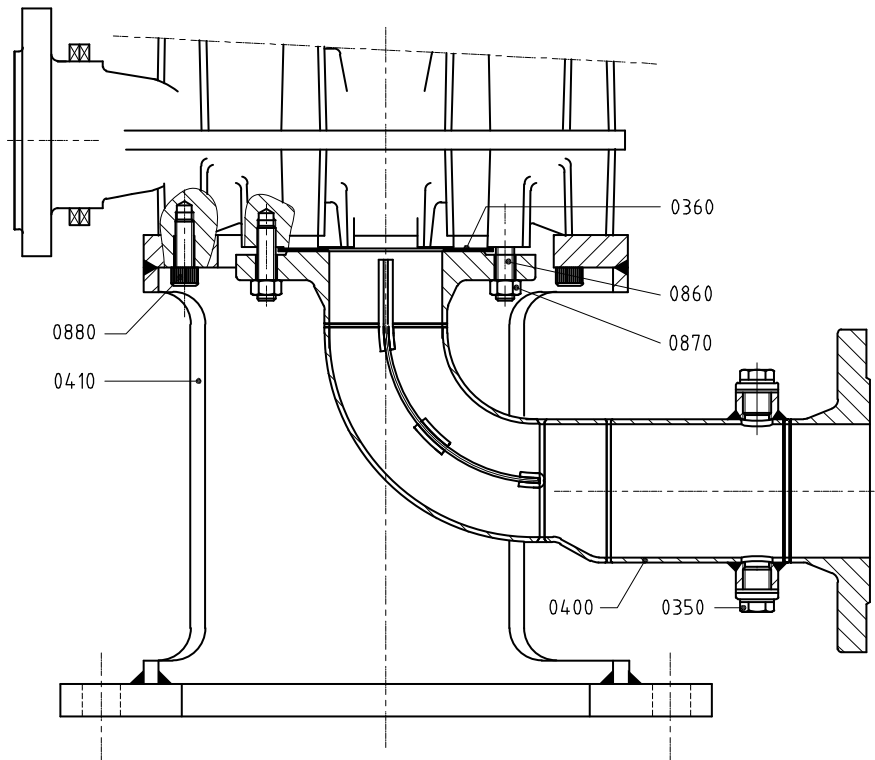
Sectional drawing suction bend 200-200 / 250B-315.
